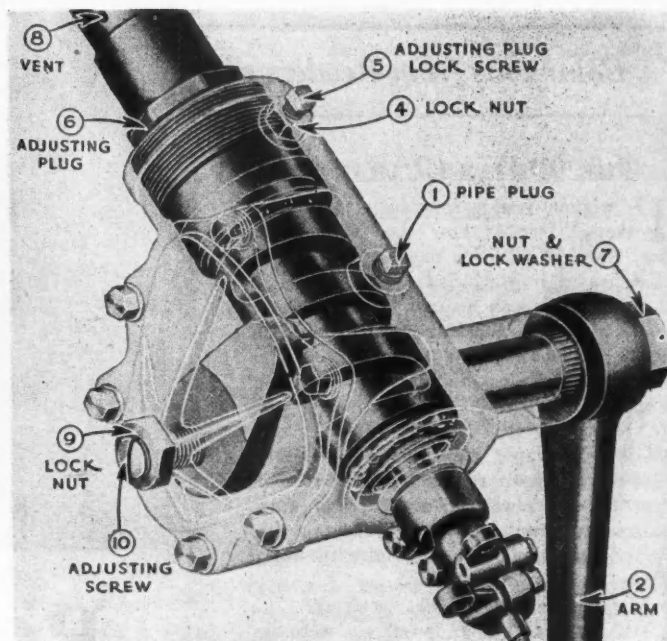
In gears of this type the adjusting screw 10 takes up end play of the cross shaft
